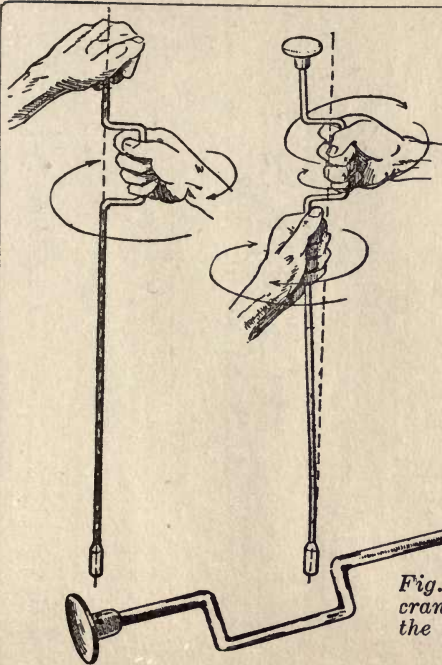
In using a speeder of any kind, greater speed can be obtained by holding the right hand on the crank and the left hand just below the crank and making both hands move. This just doubles the speed obtained by holding the right hand on the crank and the left hand on top, because the "stroke" is only half as much
